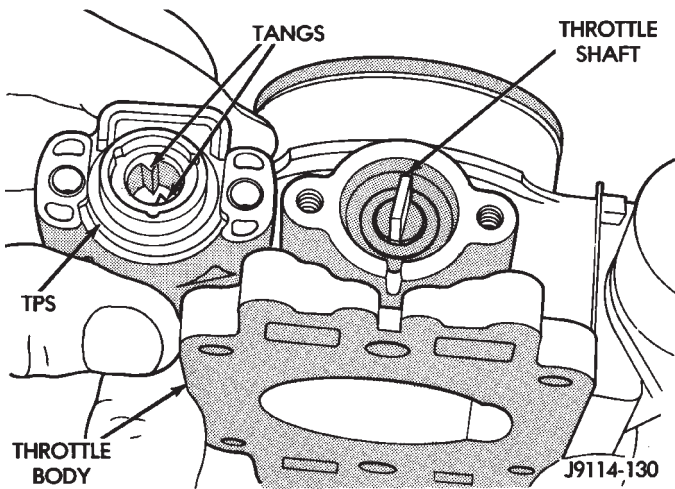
Throttle Position Sensor Installation—4.0L Engine
